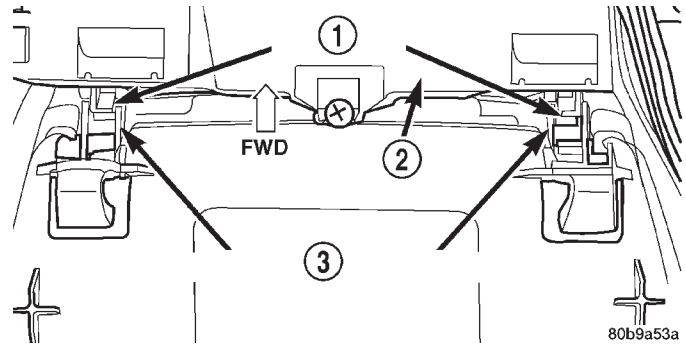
Garage Door Opener Storage Bin Door Pivot Latches
